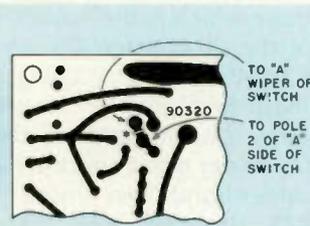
Corner of foil side of control board showing location of foil trace requiring break and wiring for section A side of DPDT switch.
